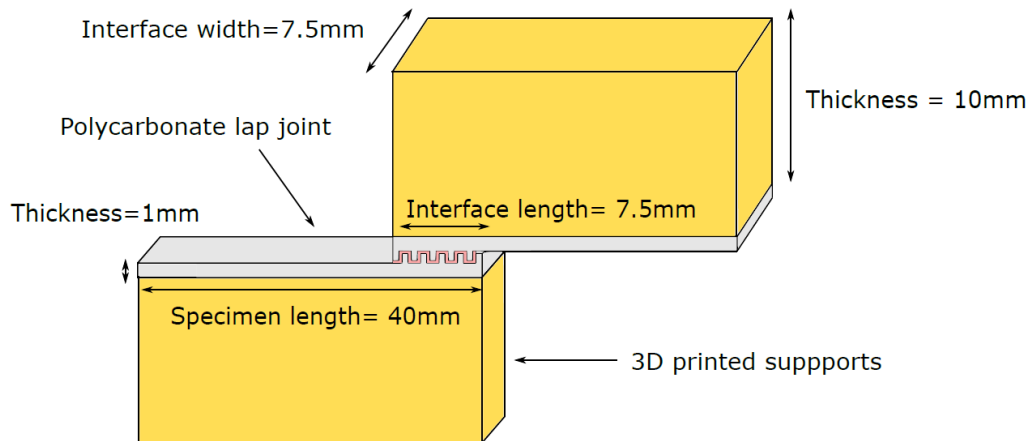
Schematic diagram and dimensions for a structured interlocking joint. Samples (grey) were cut to a length of 40 mm and bonded to thicker custom supports (orange) designed to prevent bulk failure of the polycarbonate. The dimensions of the structured bonded interface are 7.5 mm x 7.5 mm.
